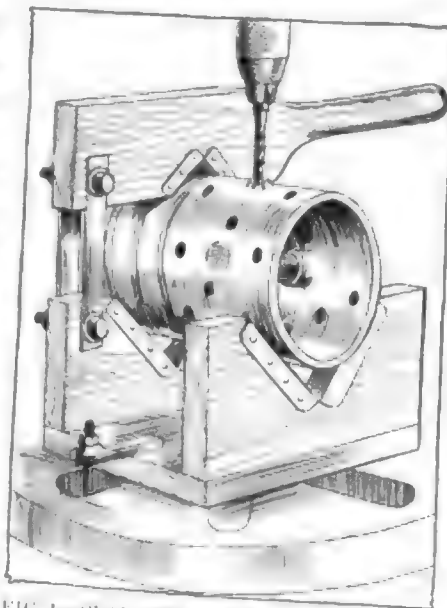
CLAMP TO HOLD PISTONS UNDER DRILL WHILE BORING OIL DRAINS
